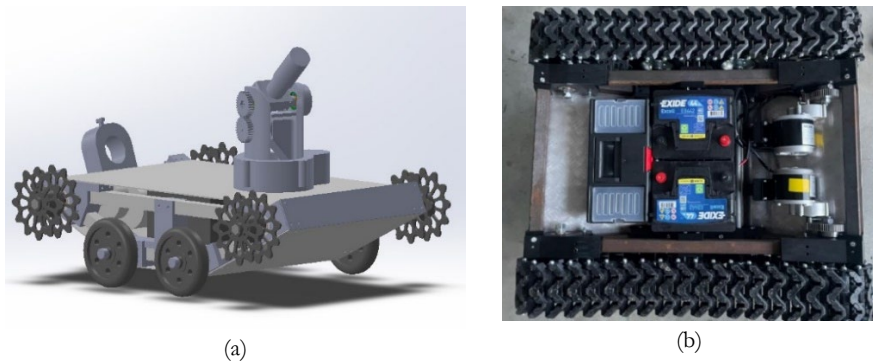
a) CAD model of firebot, b) drive assembly with mounted components.
